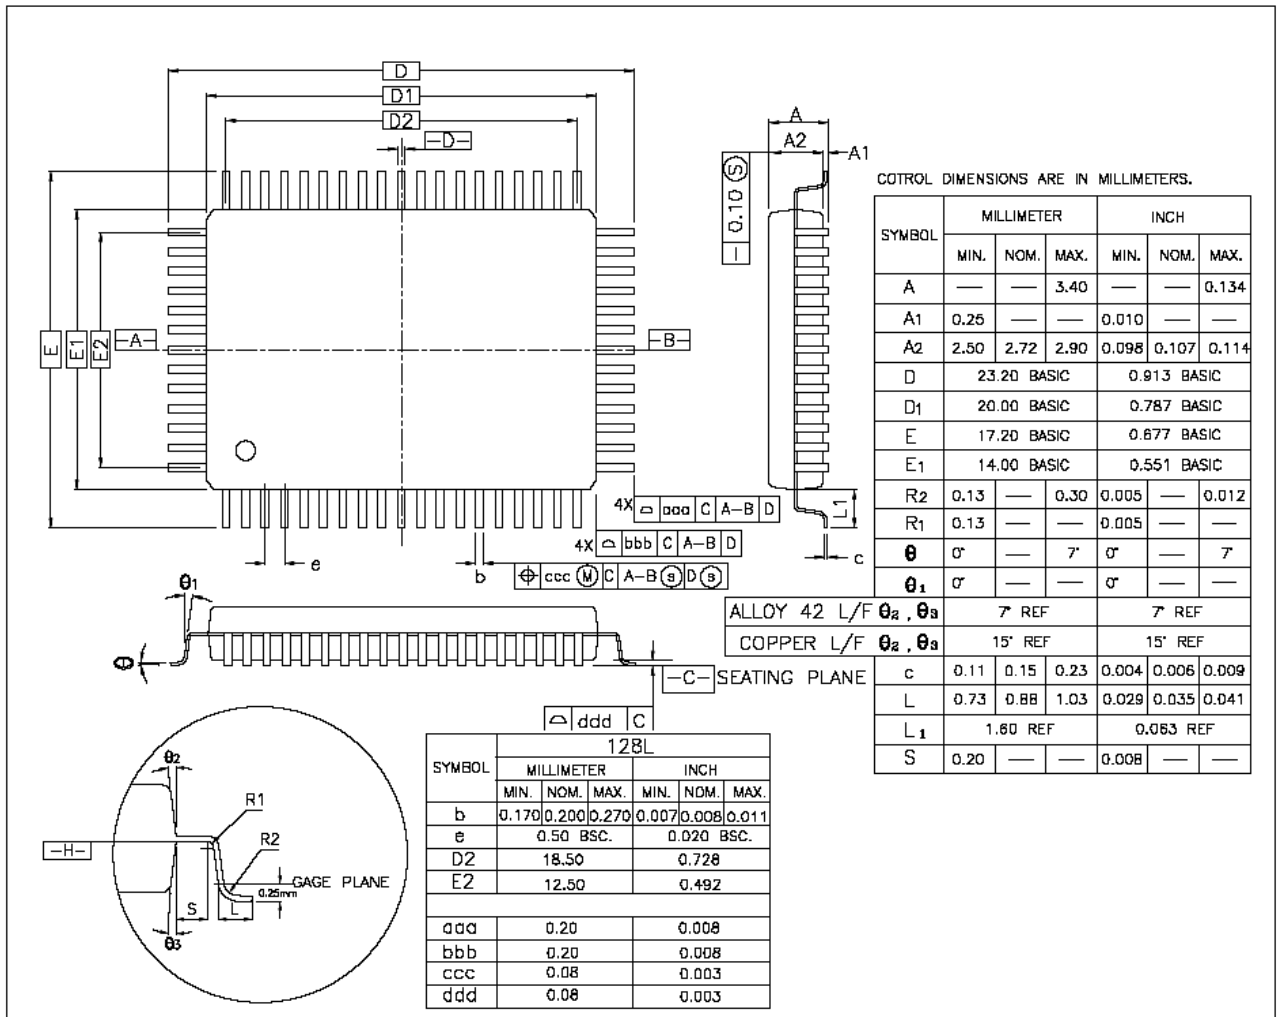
STR8131/CNS2131, STR8132/CNS2132, STR8181/CNS2181 Package Outline and Dimensions— PQFP-128
